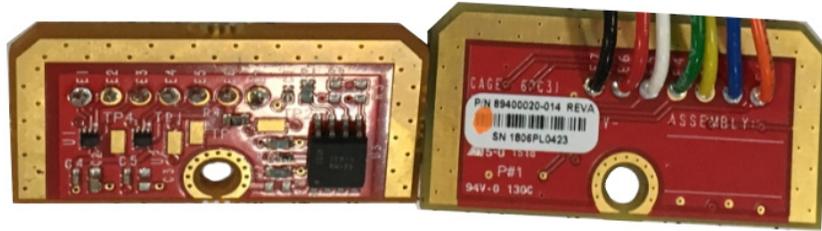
Wired Configuration Module Circuit Card Assembly
